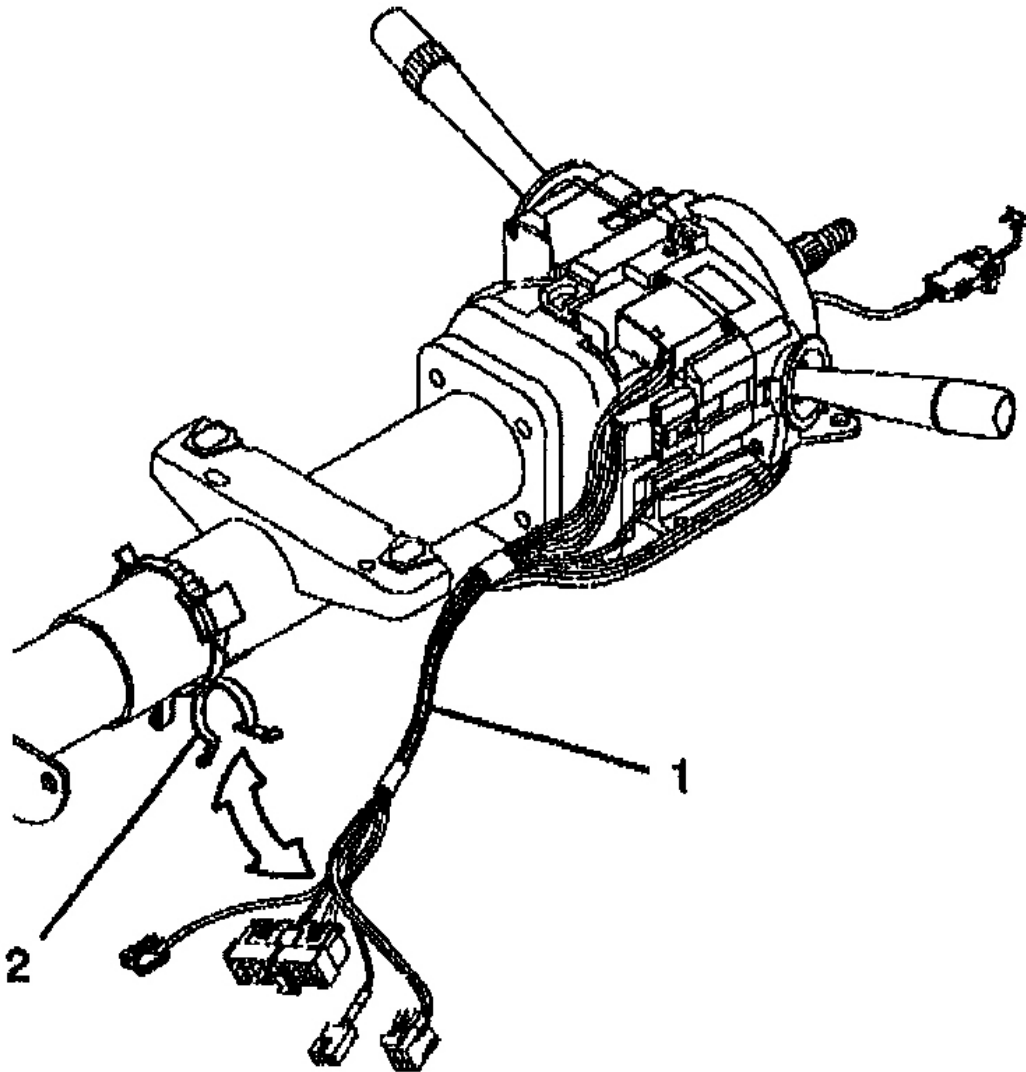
Installing Inflatable Restraint Steering Wheel Module Coil
